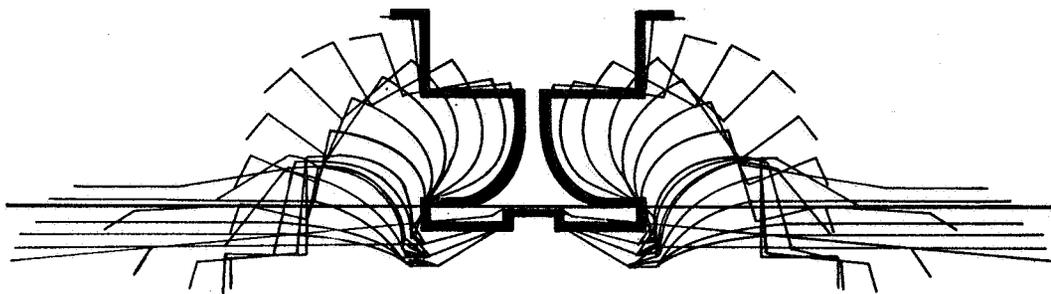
A COMPLEX SHAPE MADE FROM STAINLESS STEEL BY ROLL FORMING ON A 20-STATION MACHINE (Ref. 113)
